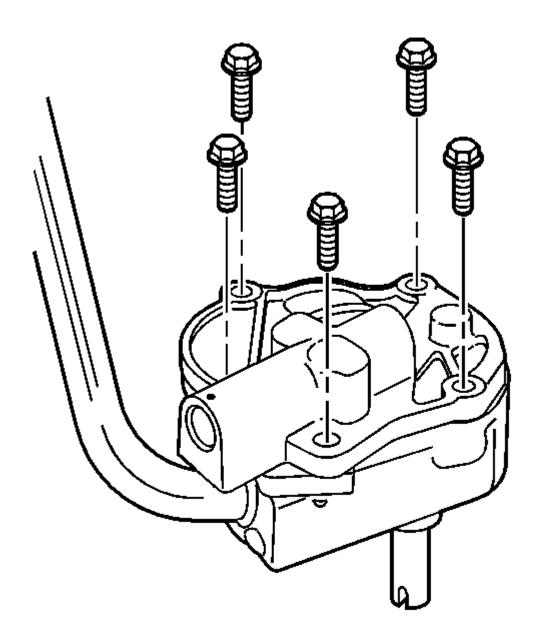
View Of Oil Pump Driveshaft & Retainer Courtesy of GENERAL MOTORS CORP.
